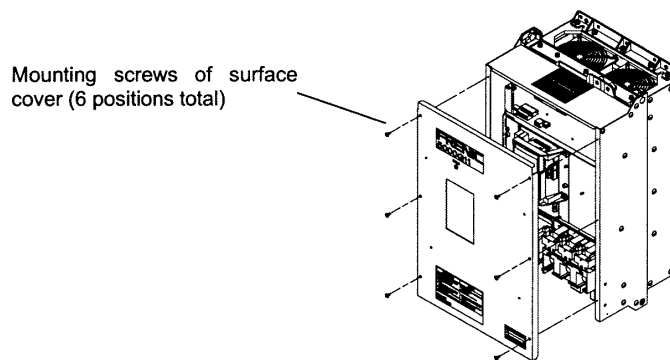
Removing the surface cover (for inverter of 40HP or more)
